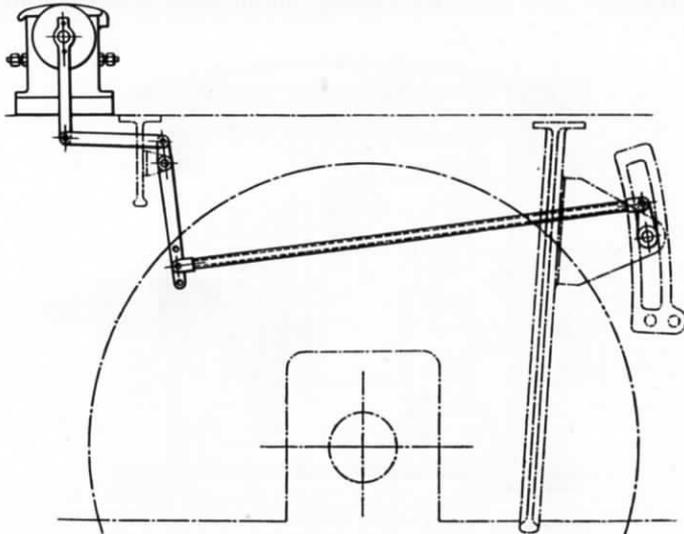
METHOD OF OPERATING MECHANICAL LUBRICATOR FROM DIE BLOCK OF WALSCHAERTS VALVE GEAR. (See also Figs. 216 and 217.)
